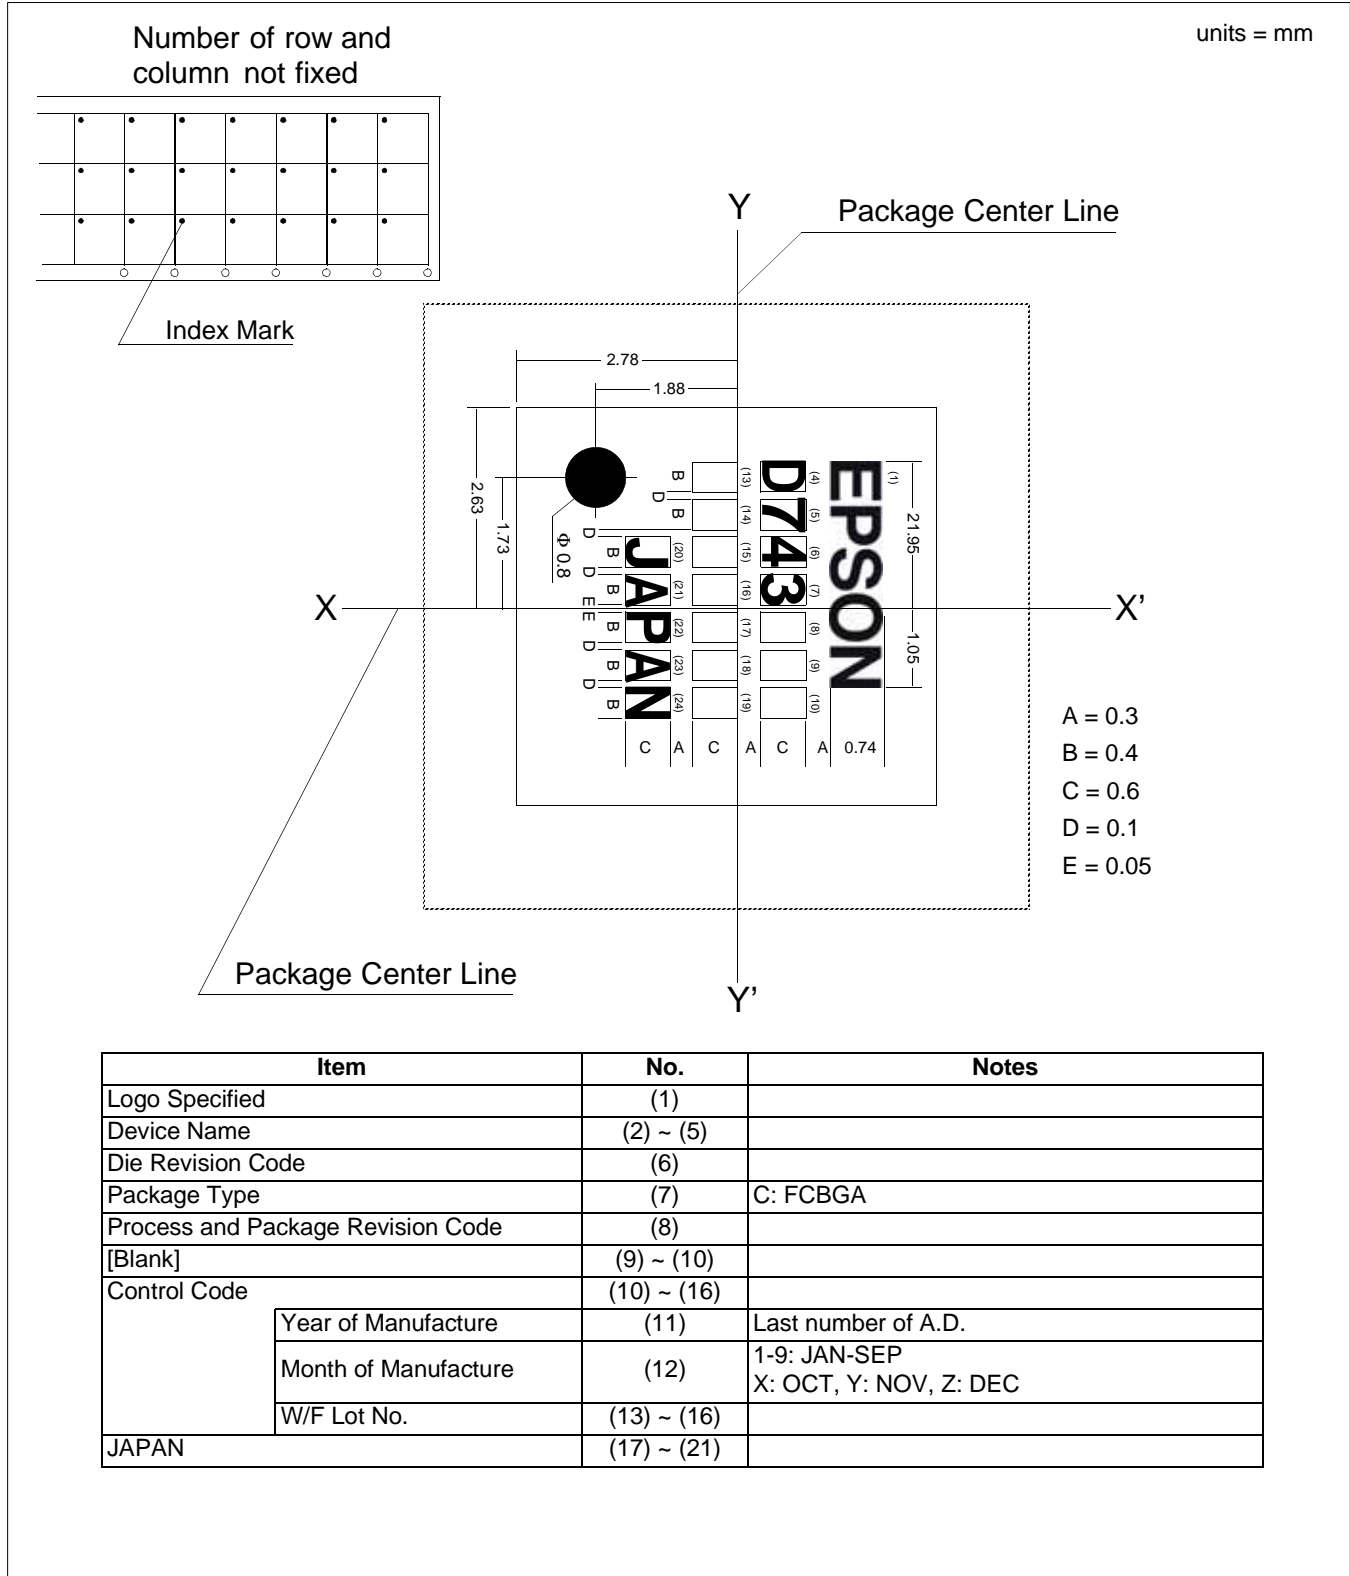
S1D13743 FCBGA 121-pin Package Marking
